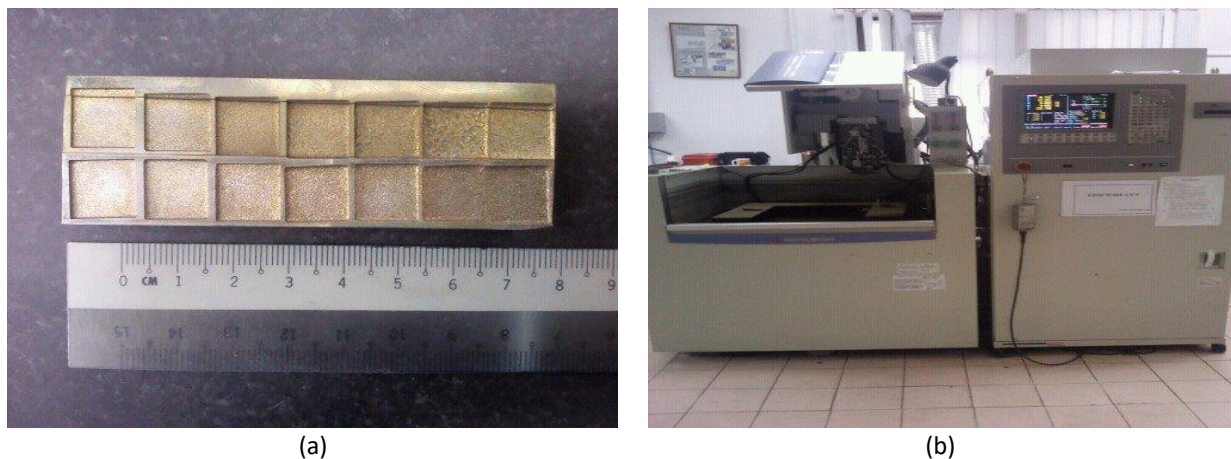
(a) The stainless steel workpiece and (b) the EDM machine
